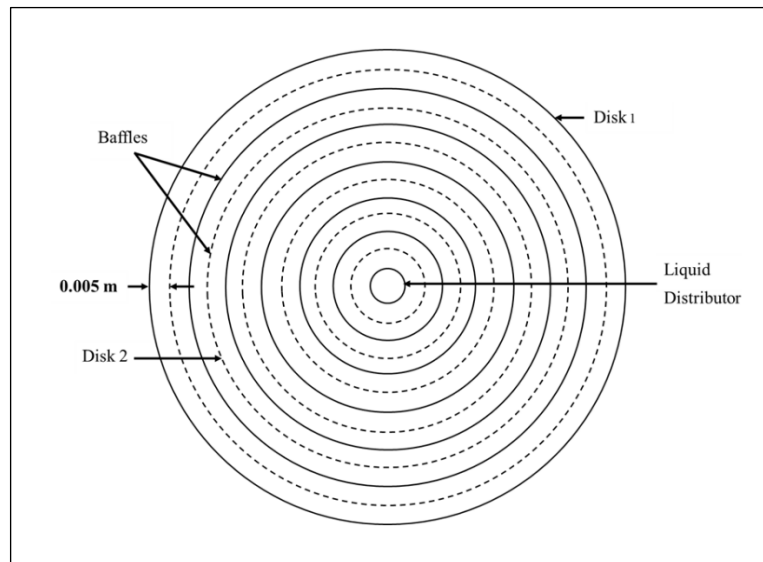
(b): Front view of Rotating Zig-Zag Contactor
